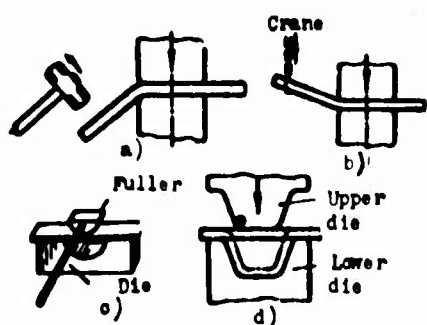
Diagram of methods of bending: a) sledge hammer; b) crane; c) with lower die and fullering; d) in a die.
